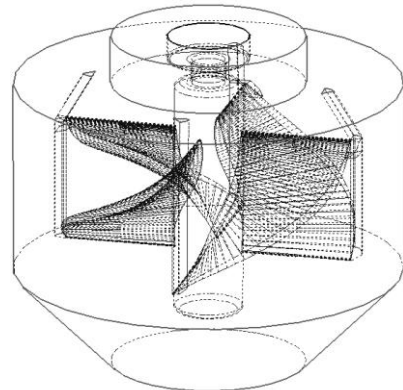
Ceramic mould for direct metal casting of hydroturbine rotor using RP 3DP technology
